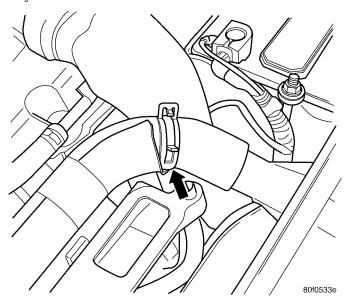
UPPER RADIATOR HOSE CLAMP - 2.4L TURBO
